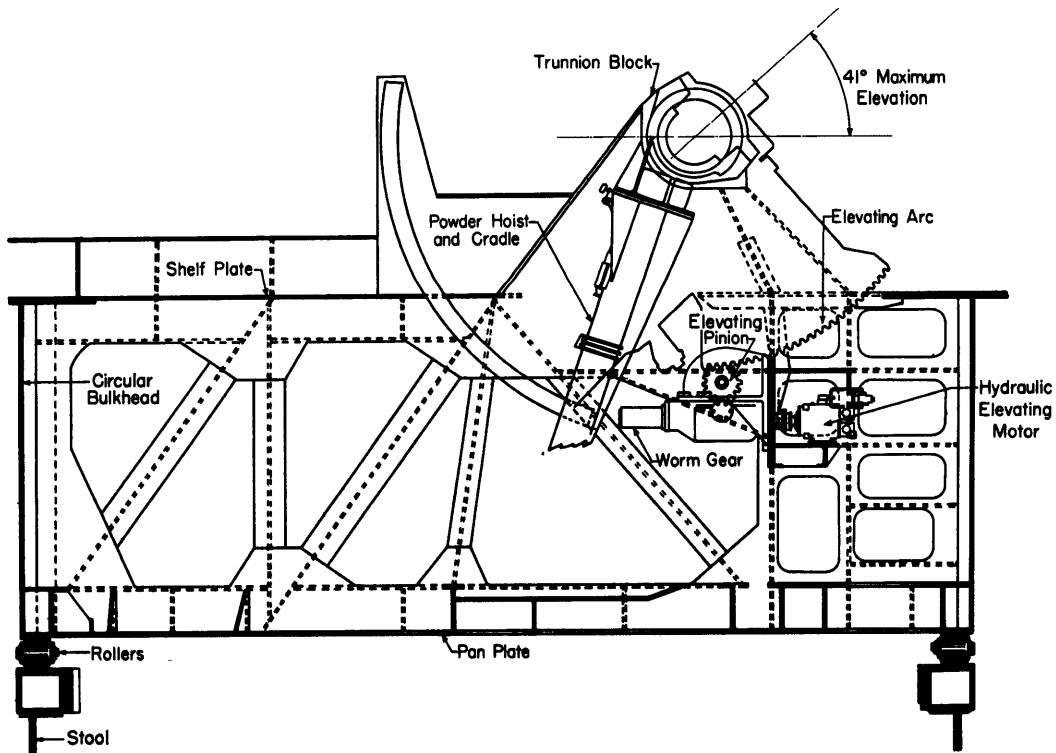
Diagram of Elevating Gear Employed in CA139 Turret
